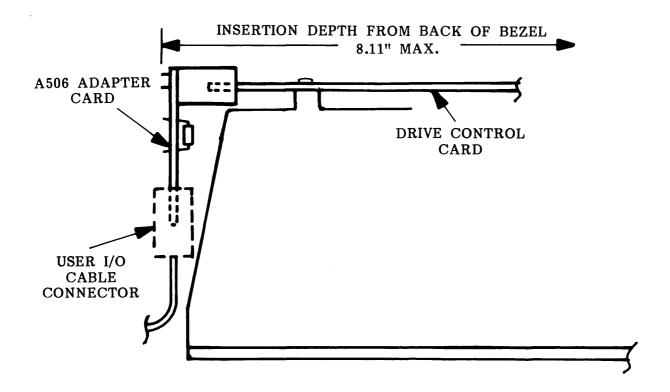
Side View Of A506 Adapter Card Installed On 5850 Drive
